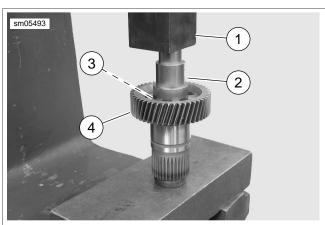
Pressing Inner Needle Bearing Assembly into Main Drive Gear: XL Models
